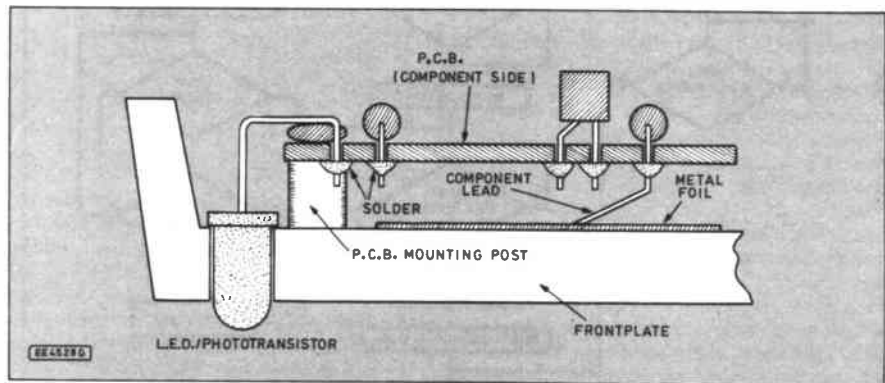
Mounting the board and touch plate connection inside the switch plate.
